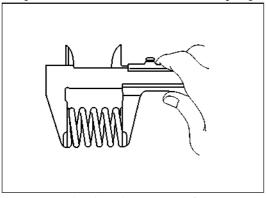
5 - 55 Measure the Free Length of Valve Spring
